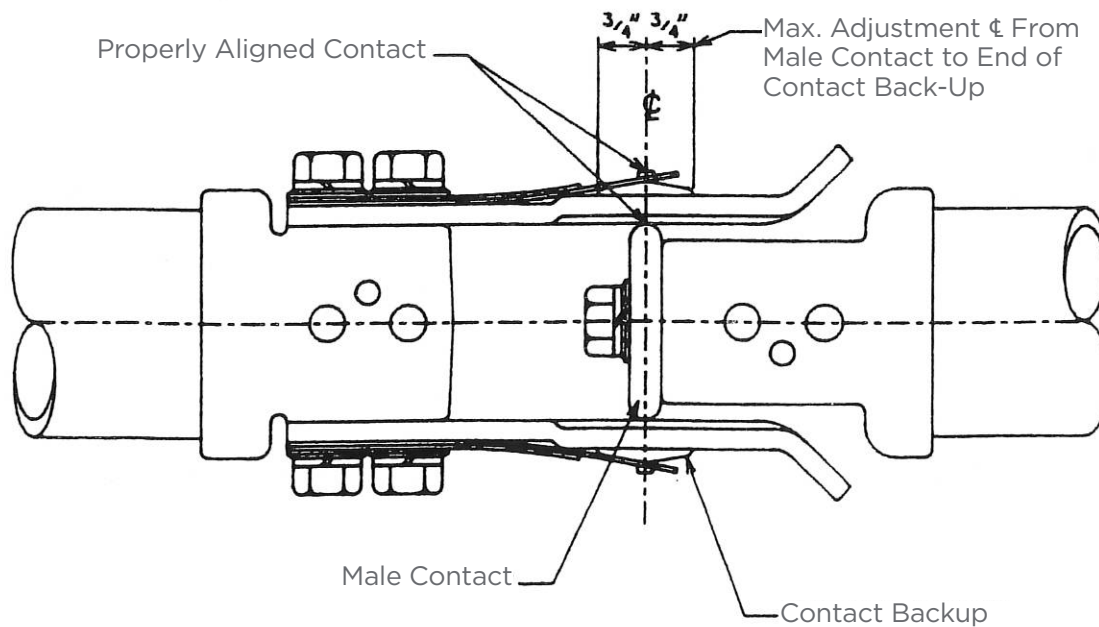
JAW CONTACT TOLERANCES
